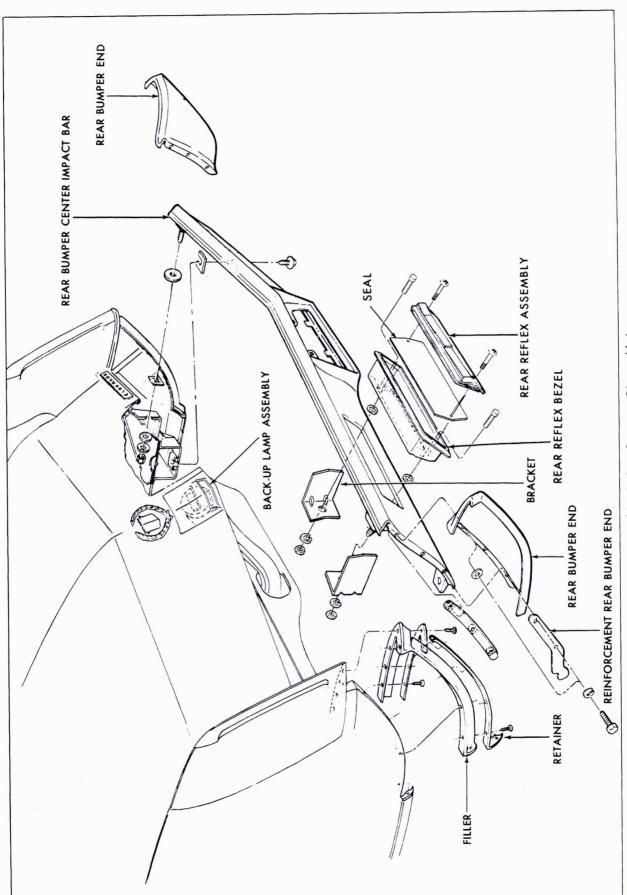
Eldorado Rear Bumper - Disassembled
